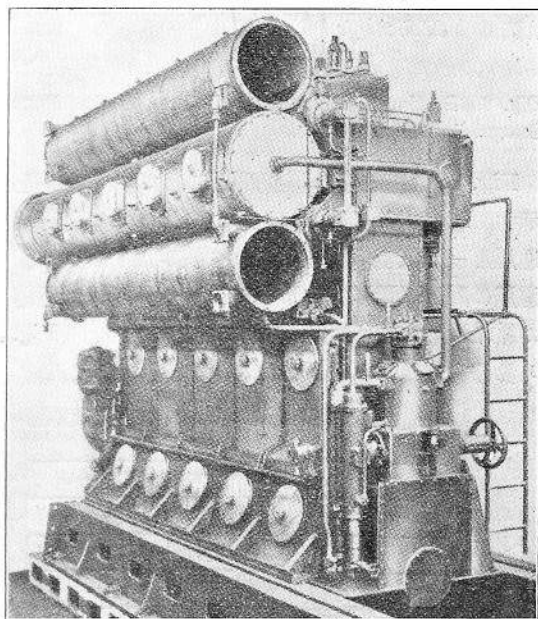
One of the Four Auxiliary Two-stroke Double-acting Diesel Engines installed to drive the Scavenging Blowers.
